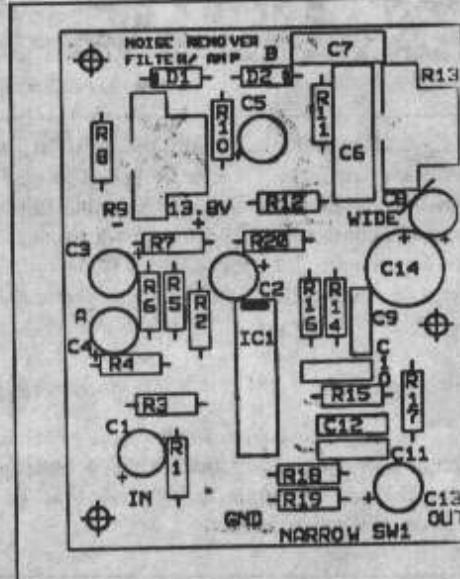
Parts placement for the noise-limiter + filter + preamp.
